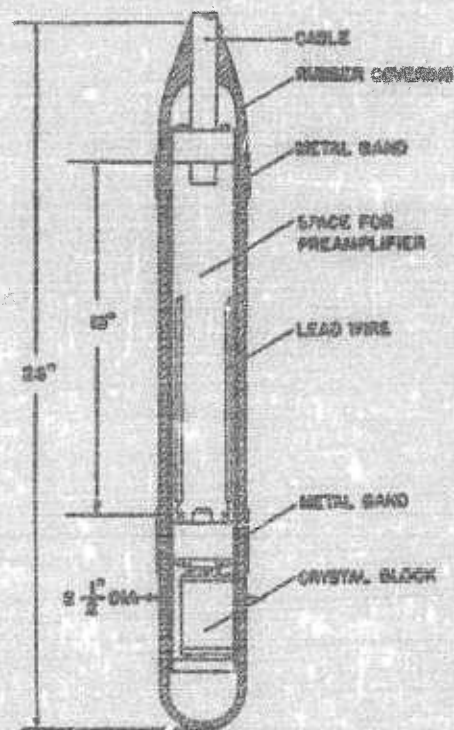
Dimensional drawing, AX-58A hydrophone.
